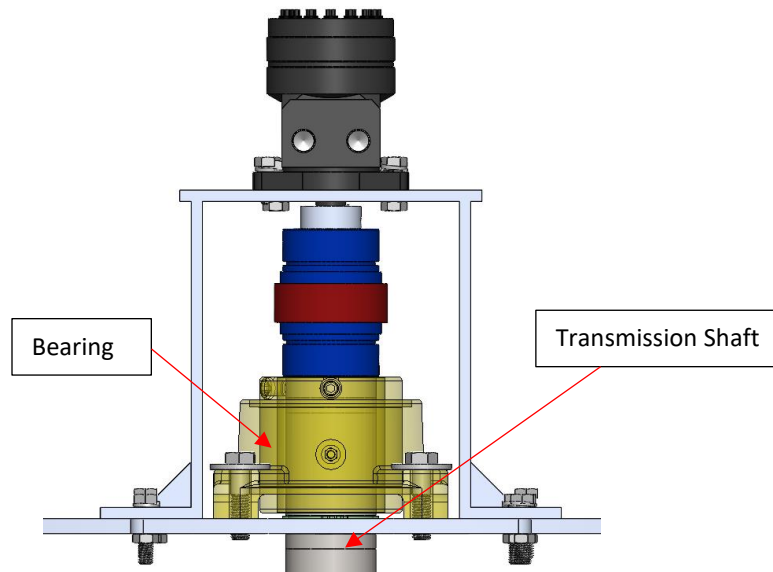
Bearing Connected On The External Diameter Of The Transmission Shaft
